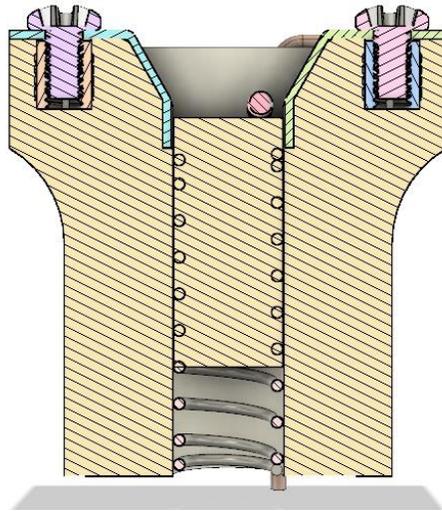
EPPT1 thruster housing assembly cross-sectional view
